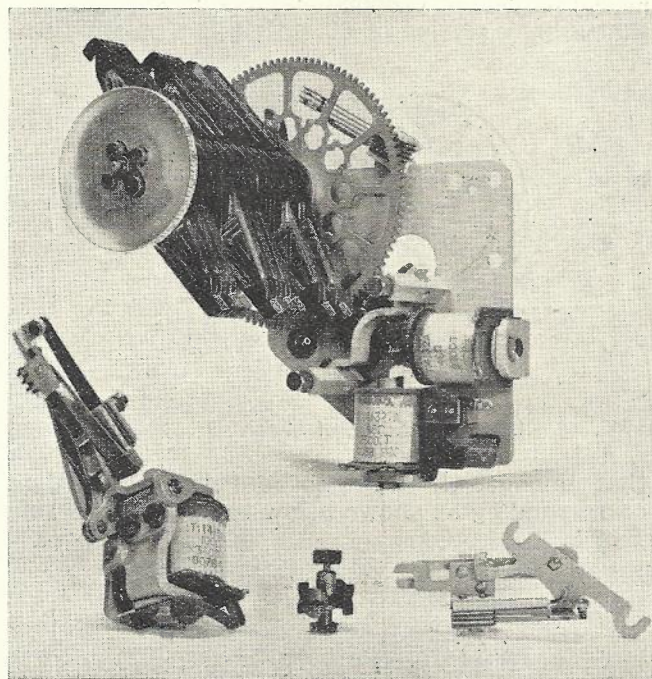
Motor Uniselector Mechanism Partly Dissembled.
